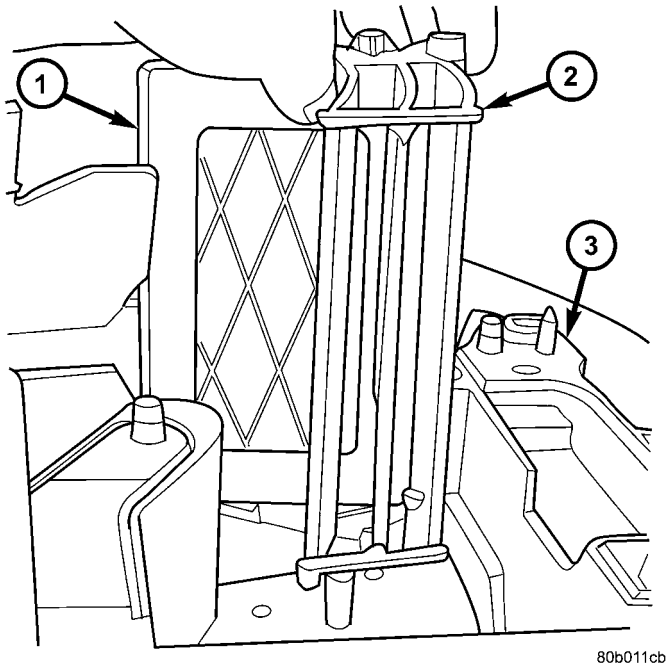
PANEL/BI-LEVEL DOOR ASSEMBLY
